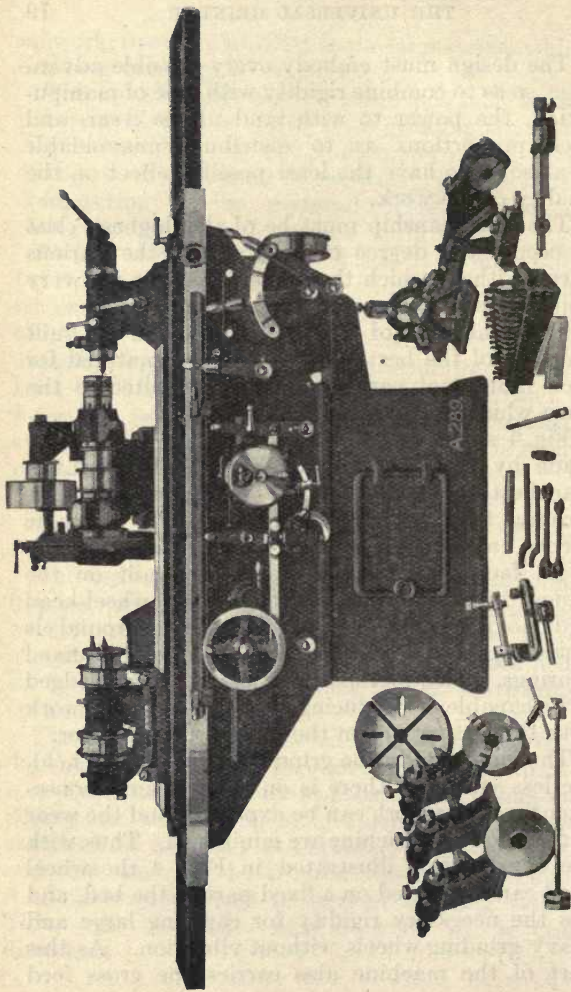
CHURCHILL UNIVERSAL GRINDING MACHINE
